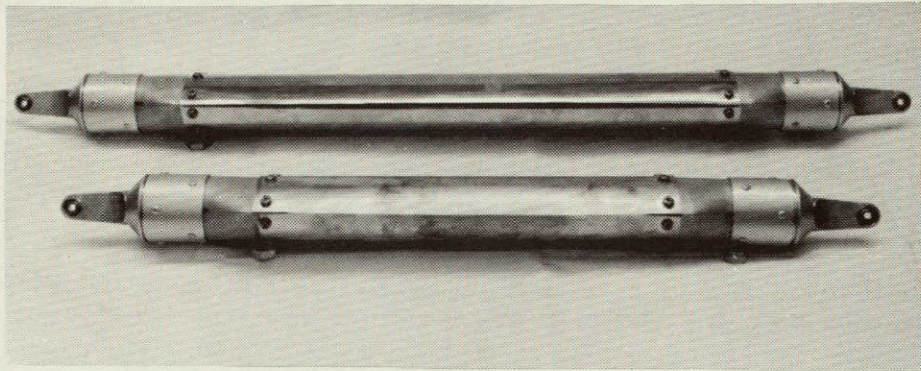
Test Specimen — Stainless Steel and Beryllium Copper Carpenter Tape Hinge
